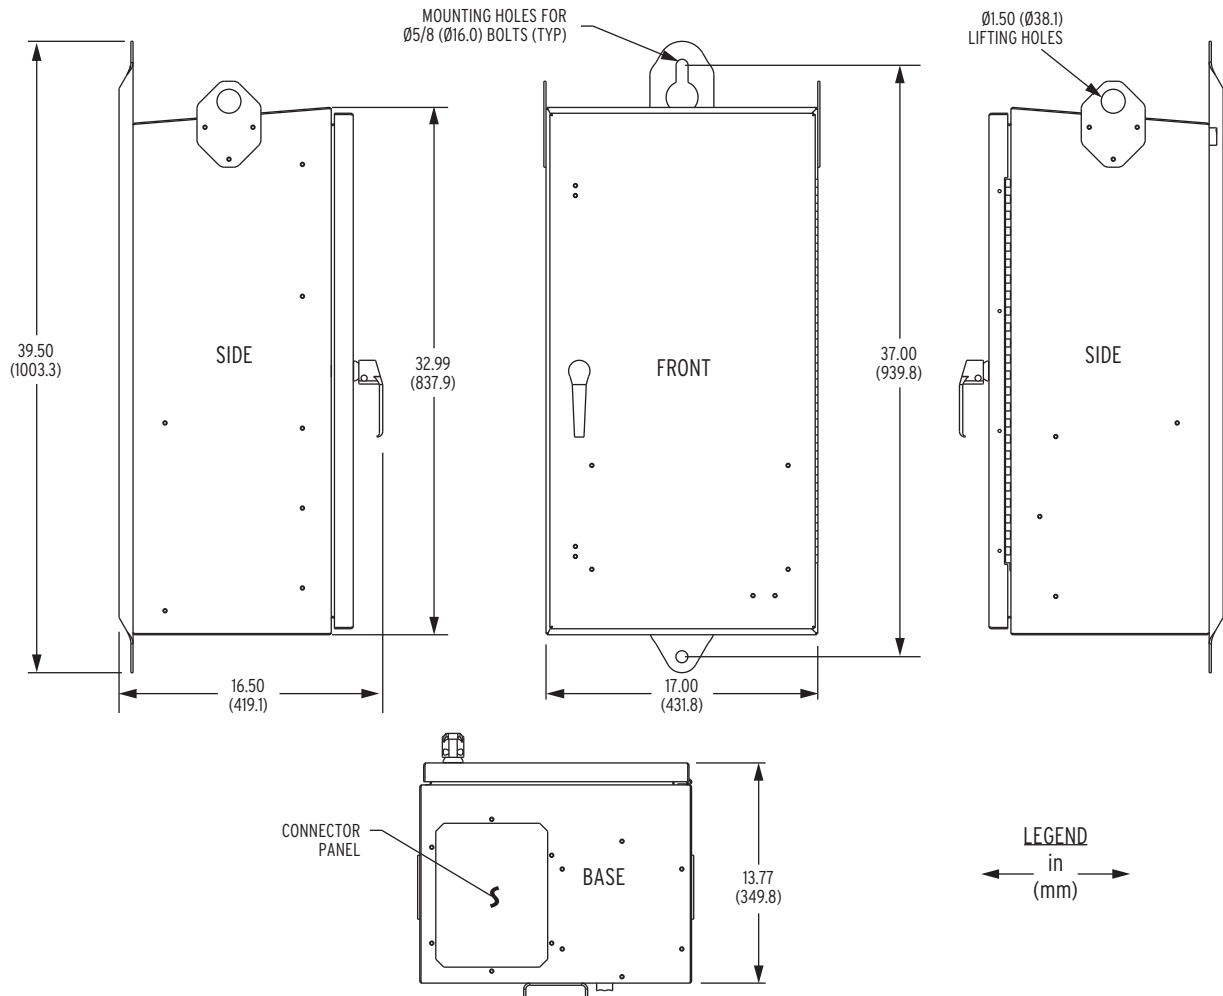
SEL-651R-2 Dimensions and Mounting Drill Plan (Single-Door Enclosure)
